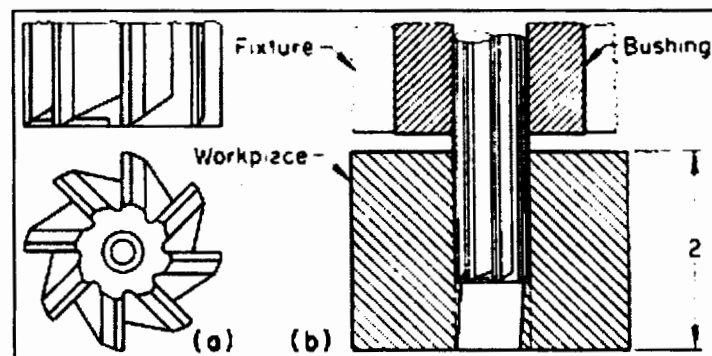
End-cutting reamer. (a) A common type of end-cutting reamer used for finishing blind holes. (b) When guided in a bushing, an end-cutting reamer can correct dimensional deviations in through holes (ASM Handbook, 1995).
